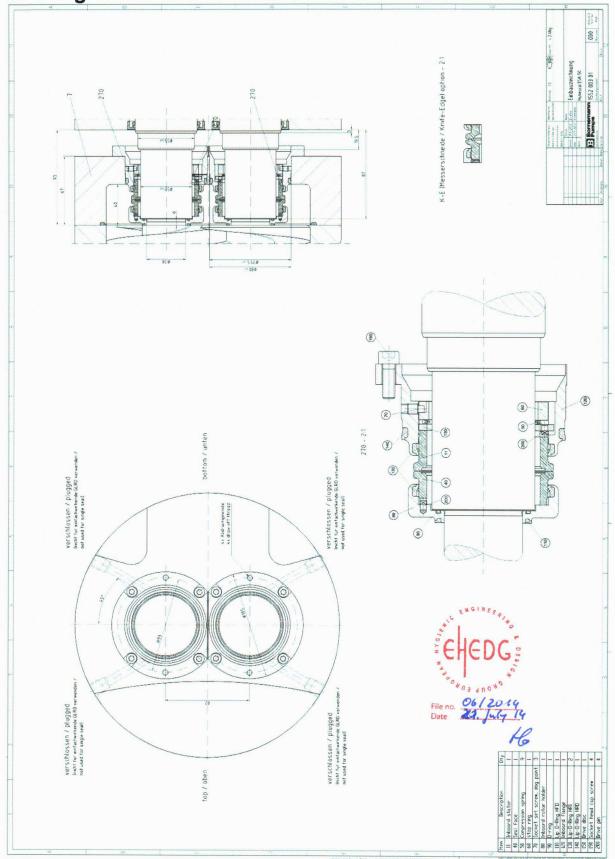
sectional drawing of the mechanical seal, Huhnseal type ESH
